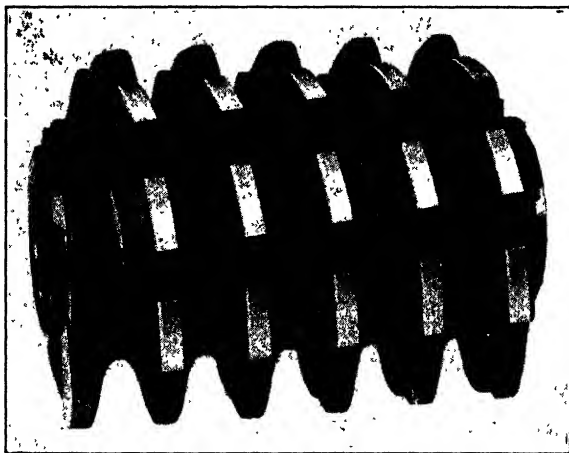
Hob-cutter. (Courtesy Union Twist Drill Co.)
